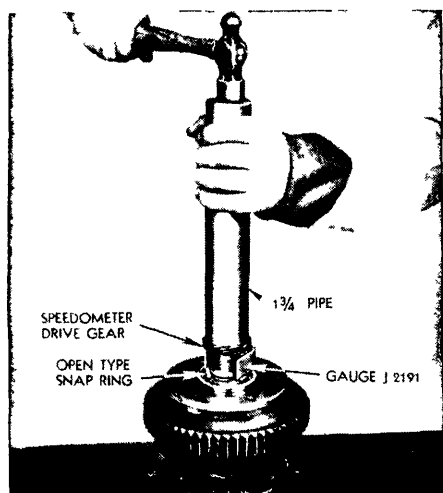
Install speedometer drive gear, using spacer gauge shown
